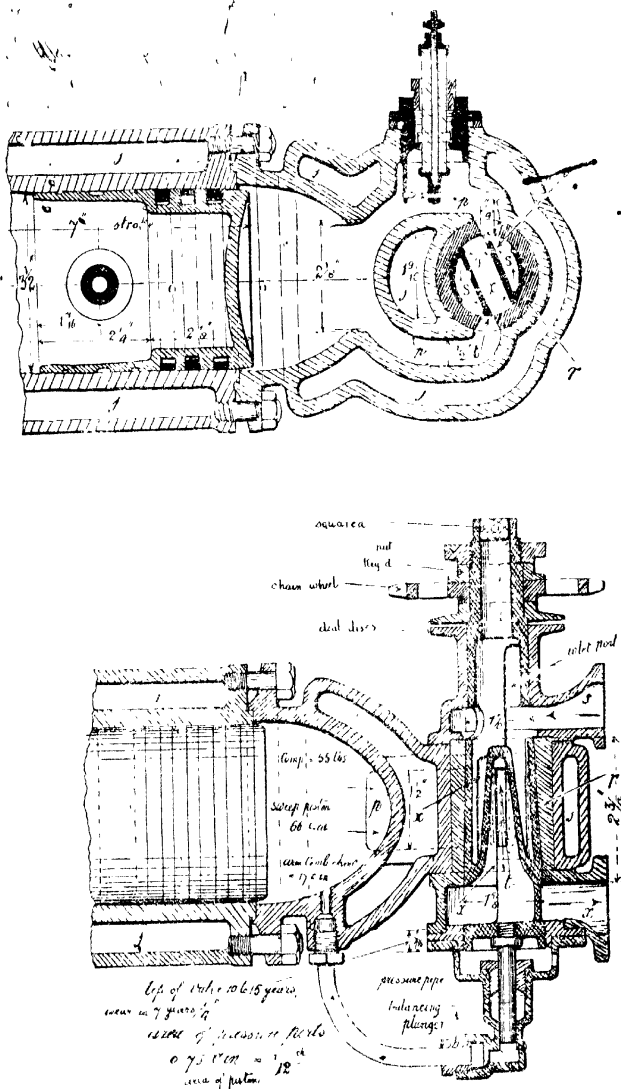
Cross-sectional elevation and plan views of rotary admission-exhaust valve used on Butler single-cylinder motor-car (1898-1905).
